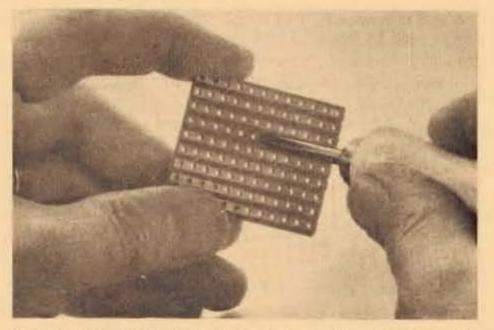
Breaking the copper strips. The spigot on the end of the tool is located in the appropriate hole; the tool is then turned clockwise to cut the strip
